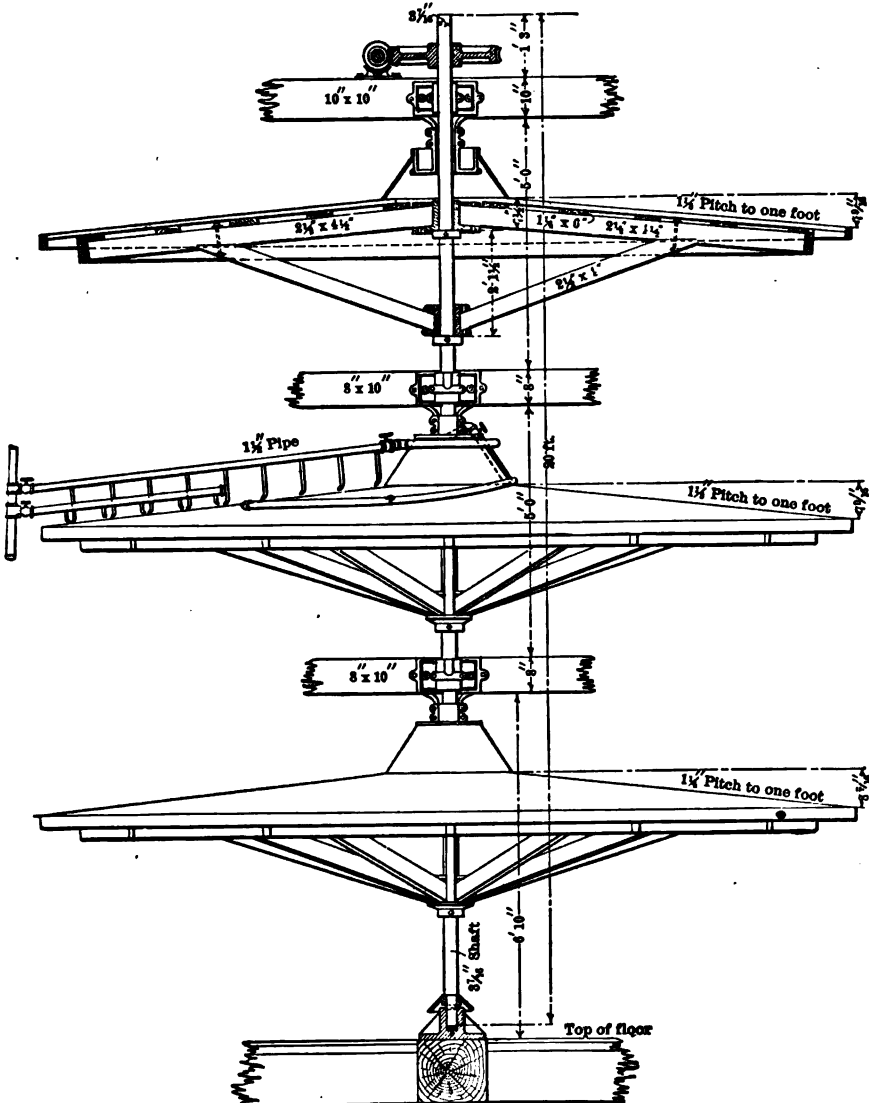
ELEVATION OF THREE-DECK SLIME TABLE.
